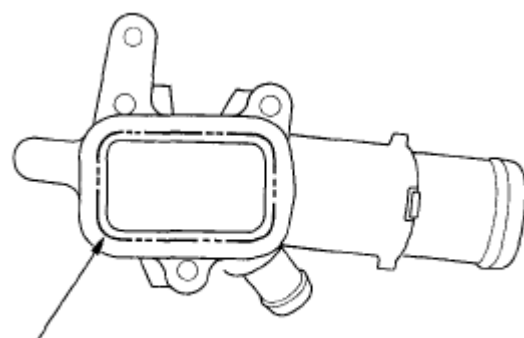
Identifying Water Outlet And ECT Sensor 1Courtesy of AMERICAN HONDA MOTOR CO., INC.INSTALLATION
